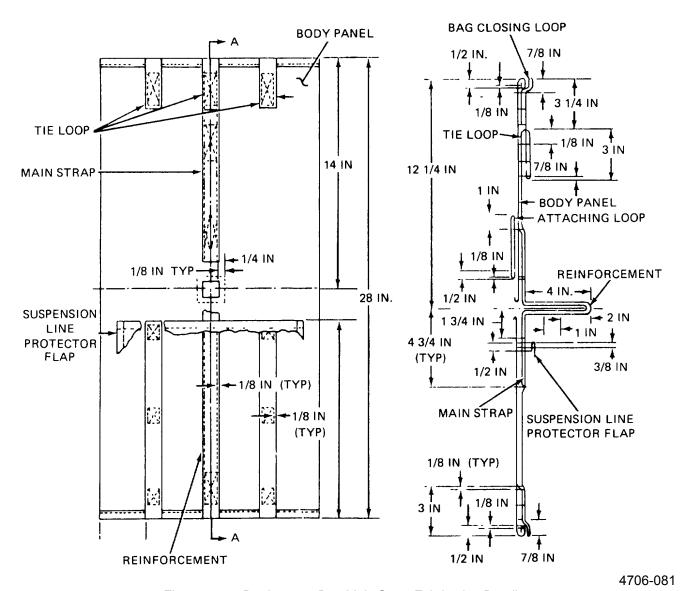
Deployment Bag Main Strap Fabrication Details.
